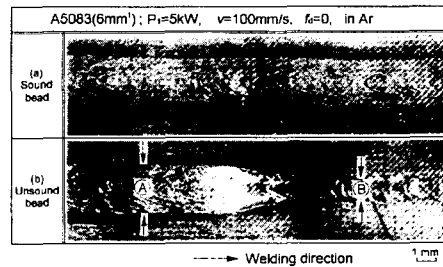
Examples of sound and unsound CO₂ laser weld beads formed in A5083 alloy.
